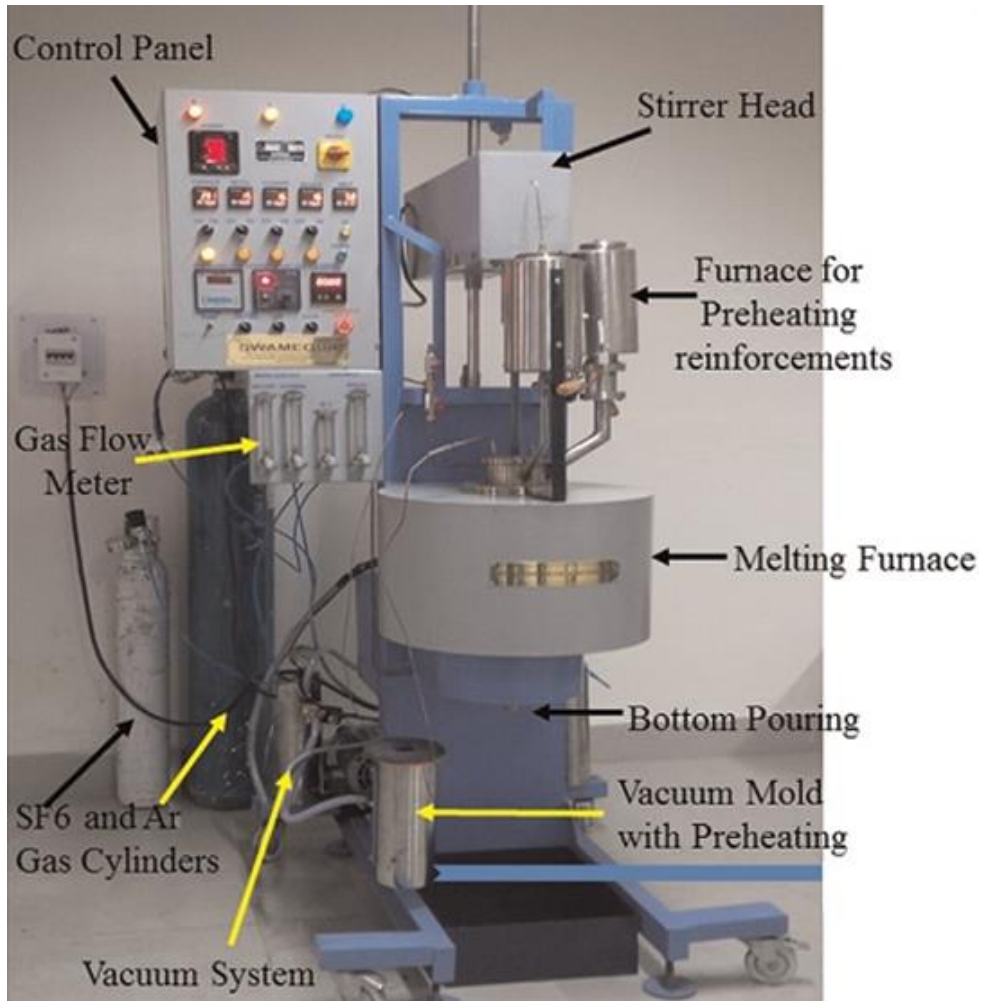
Schematic image of bottom pouring stir casting machine.
